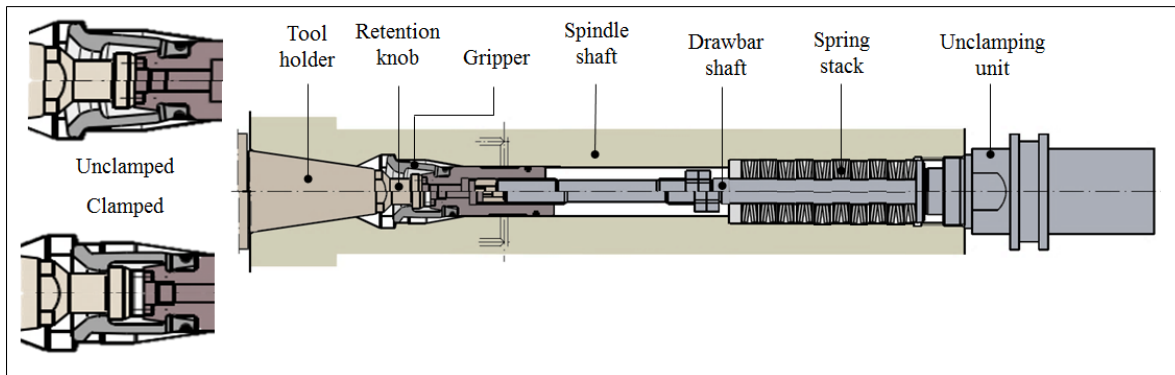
Drawbar under unclamped and clamped position inside the shaft. Adapted from (Otto-Jakob)
